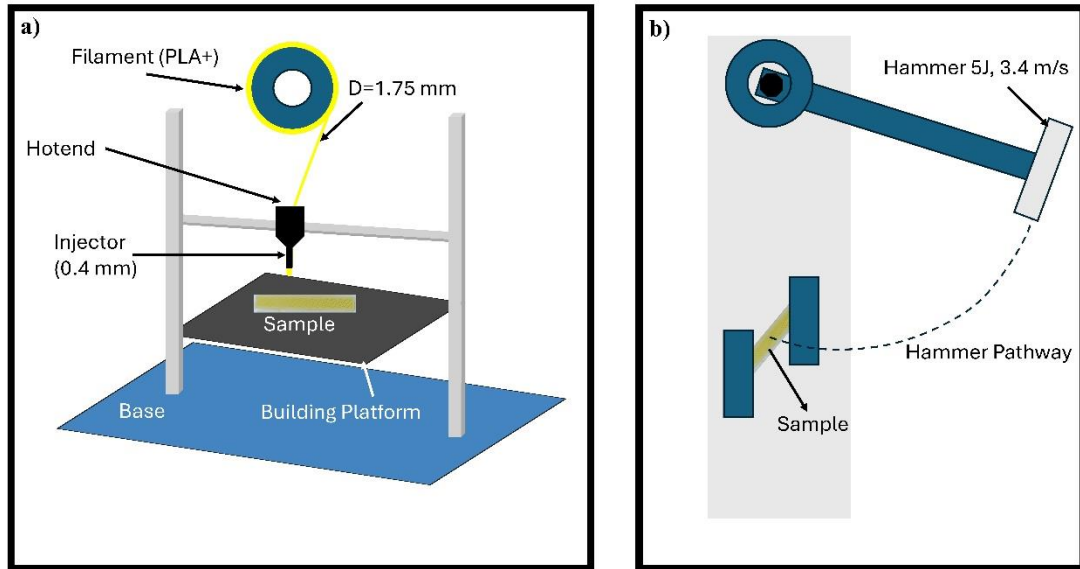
a) FDM system used for manufacturing, b) Charpy Impact test machine and manufactured samples.
